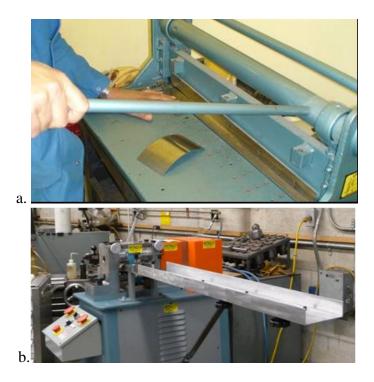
a) Hand operated shear, b) Foil slitting machine.
